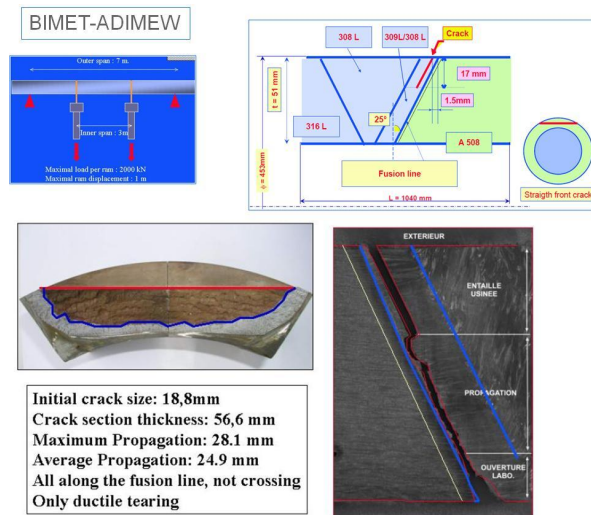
Cracked Dissimilar Metal Weld (DMW) 4-point bending tests.
